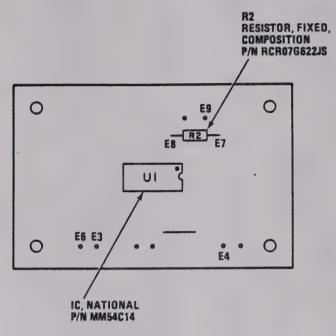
CX-13048/ARM-175 Power Cable Assembly
